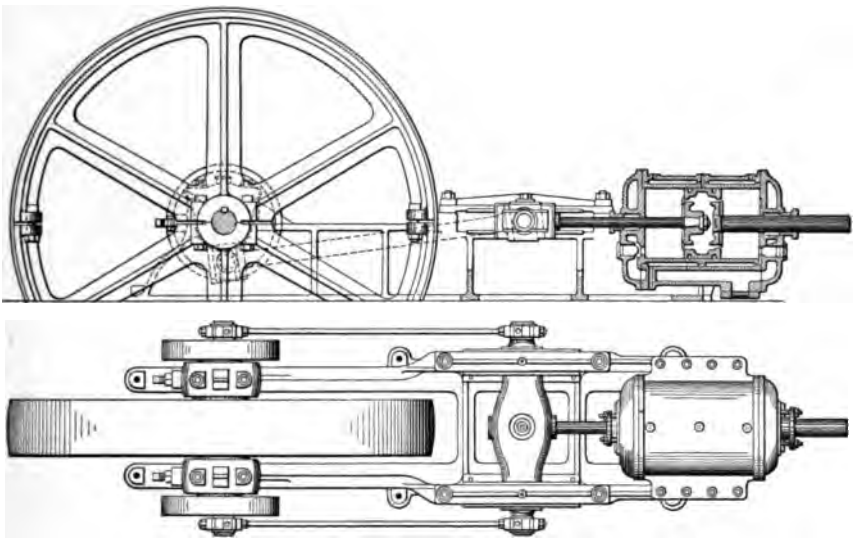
Ingersoll-Sergeant Straight-Line, Belt-Driven Compressor.
